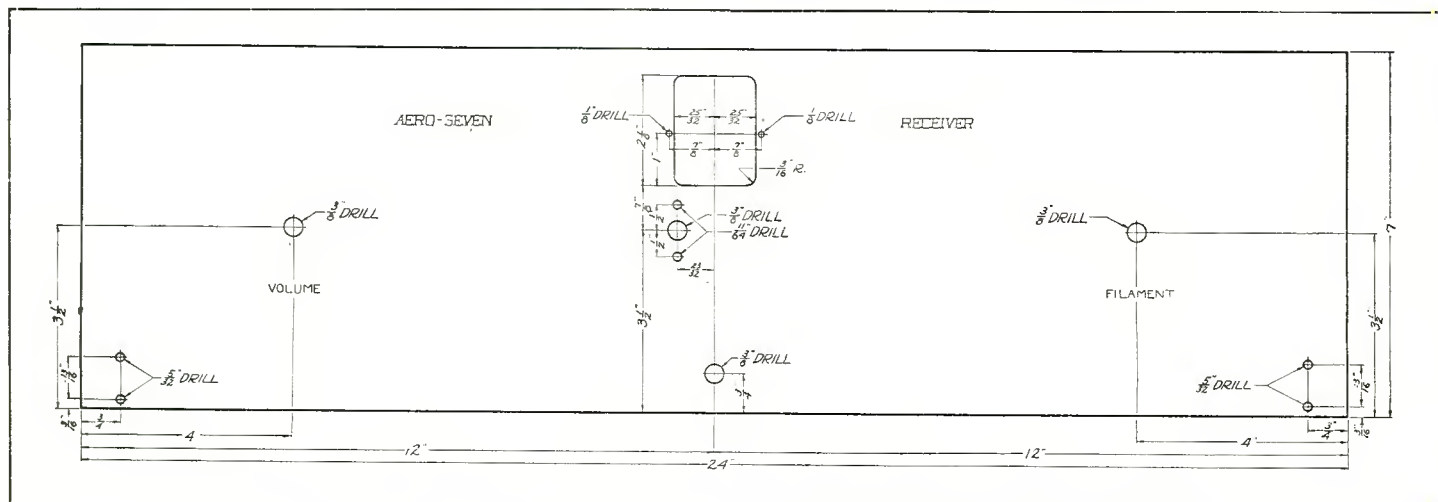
Front panel layout of the Aero A.C. Seven is shown in the drawing above
